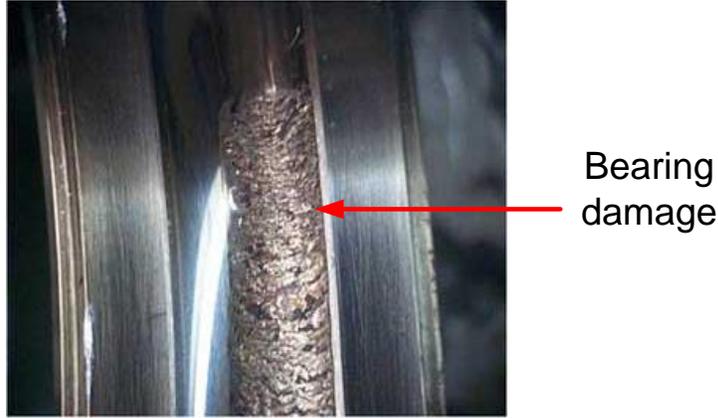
The spalling damage to a bearing race [31]
